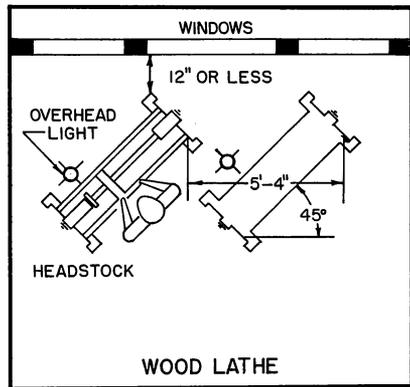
(Courtesy Rockwell Manufacturing Co.)
